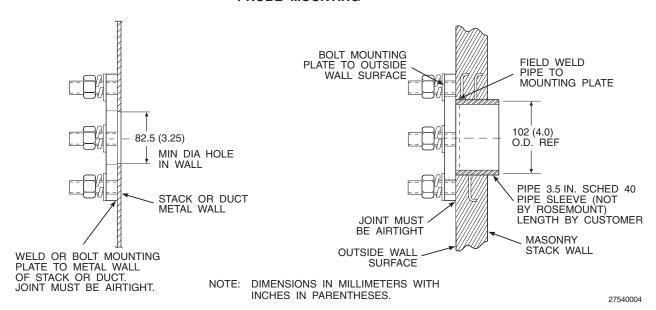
Hazardous Area Oxymitter 4000 Mounting Plate Installation
